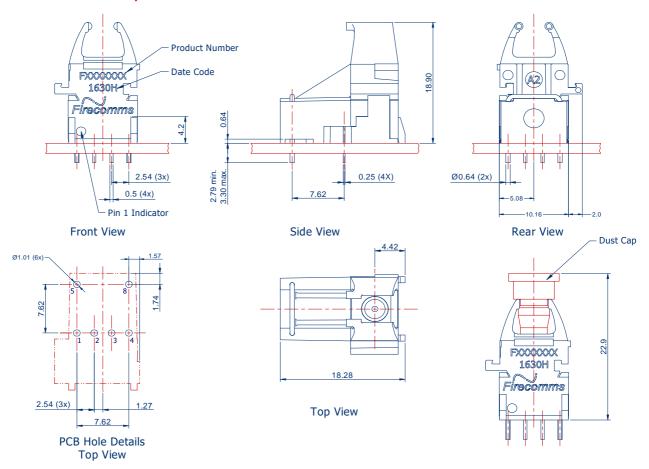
Mechanical dimensions of the vertical transmitter components and PCB footprint, which is a top view General dimensional tolerance is  $\pm\,0.2$  mm
